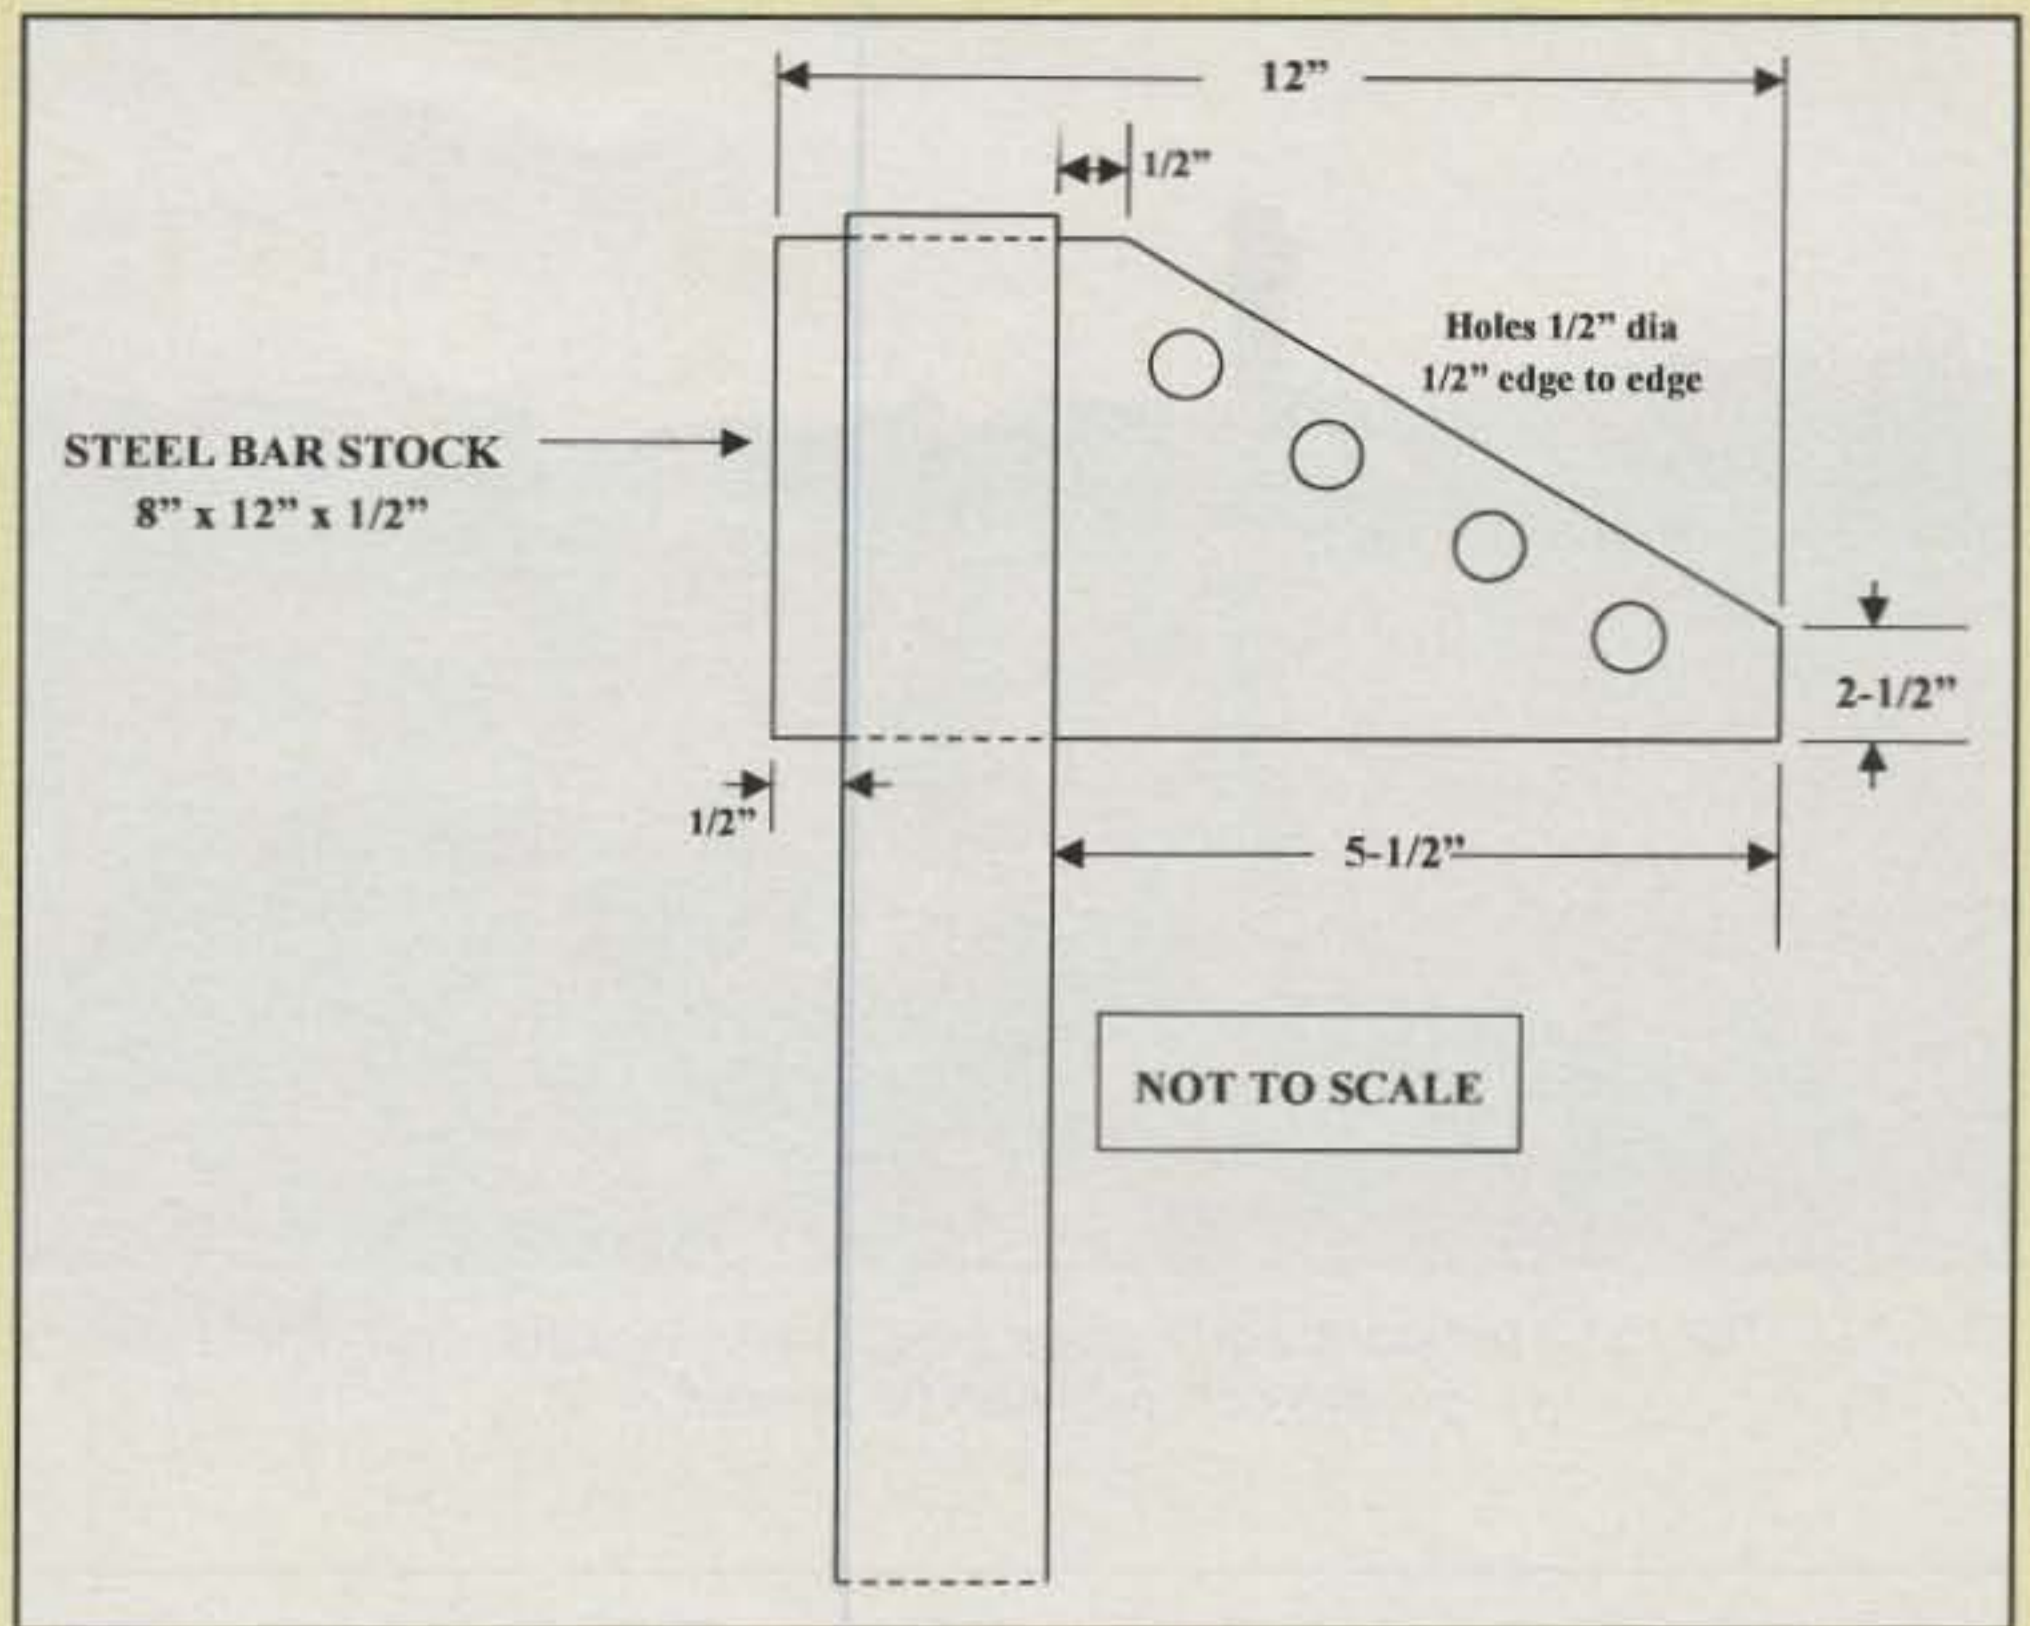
The materials and dimensions used to construct the top of the above-ground guy anchor.
